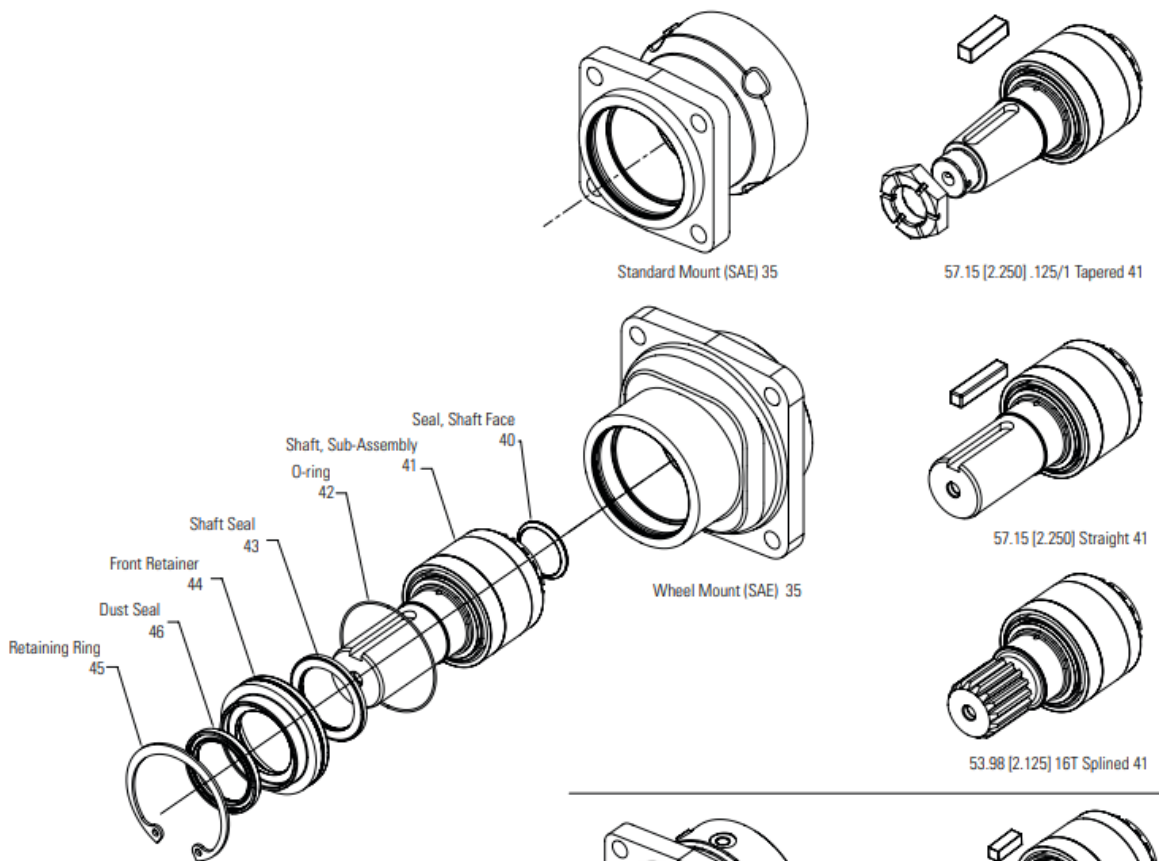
Two-Speed Standard and Wheel Motor Exploded view
